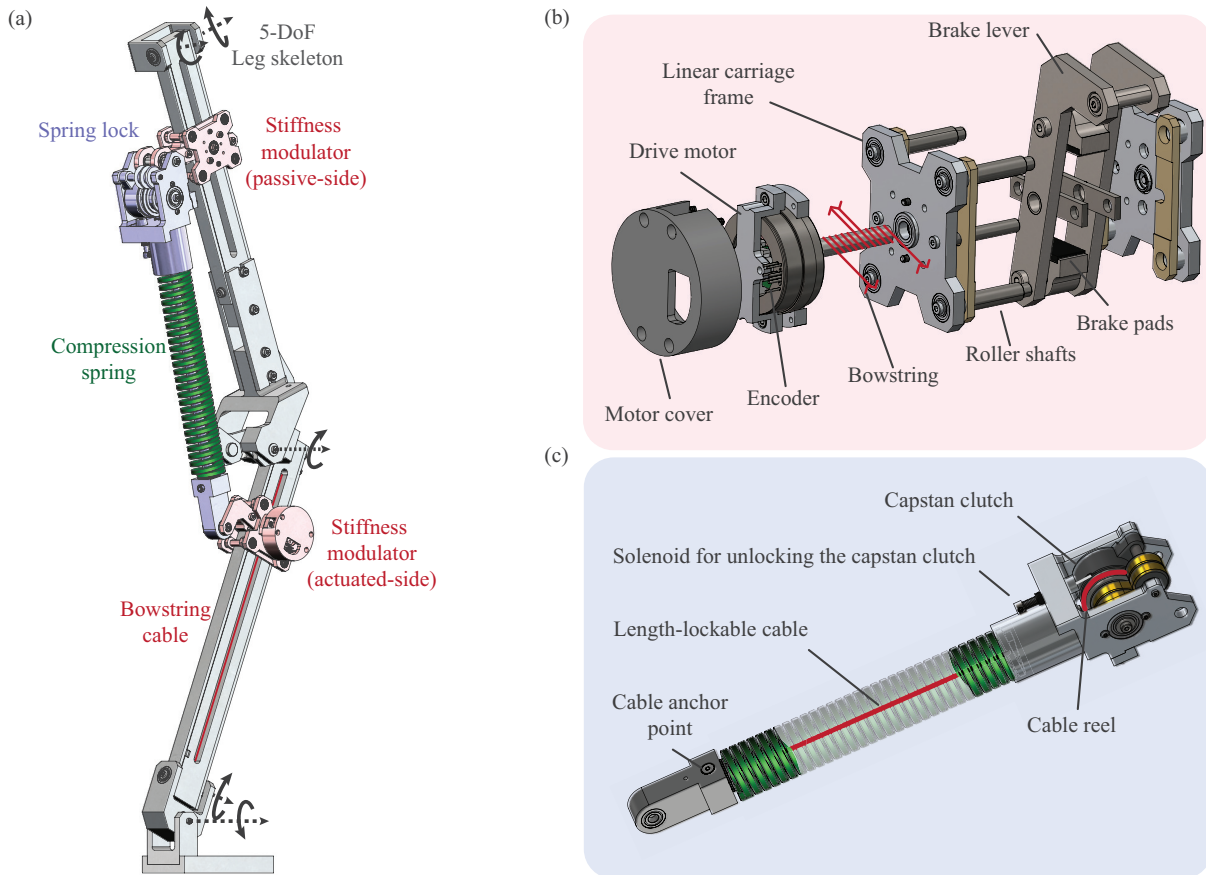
Floating spring leg. (a) CAD model of the leg with the main components. (b) Design of the stiffness modulation mechanism; the motorized self-locking slider. (c) CAD model of the lockable spring.
